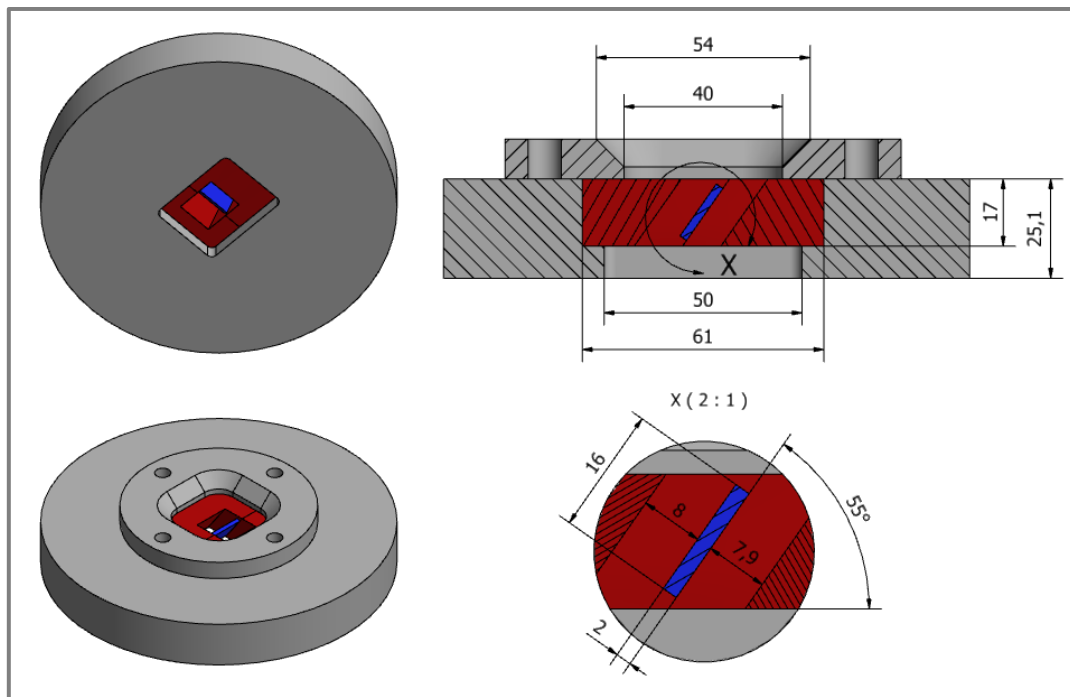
3D CAD model of AFM trial fixture, test coupon (blue), hardened steel coupon clamp (red)
